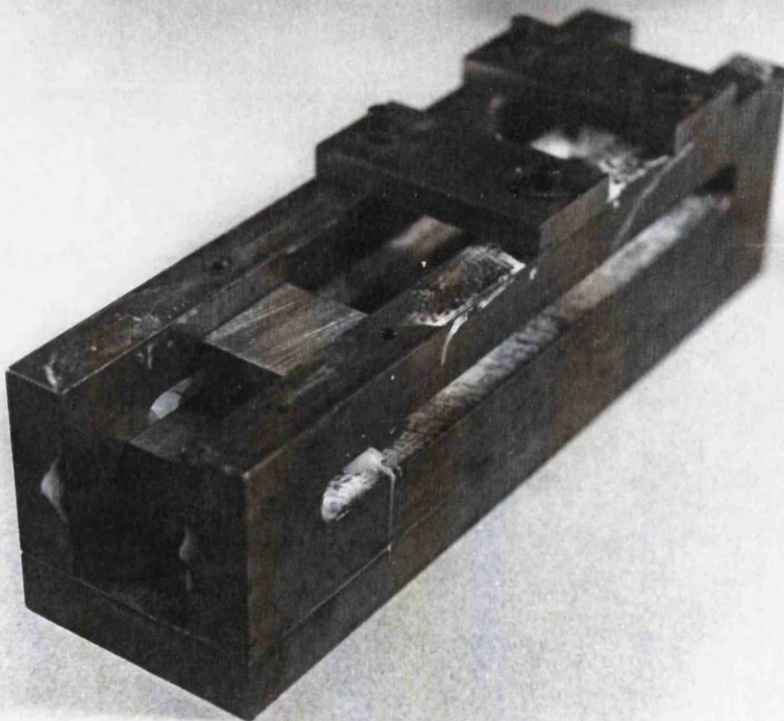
ASSEMBLY JIG FOR STANDARD IMPACT SPECIMENS
